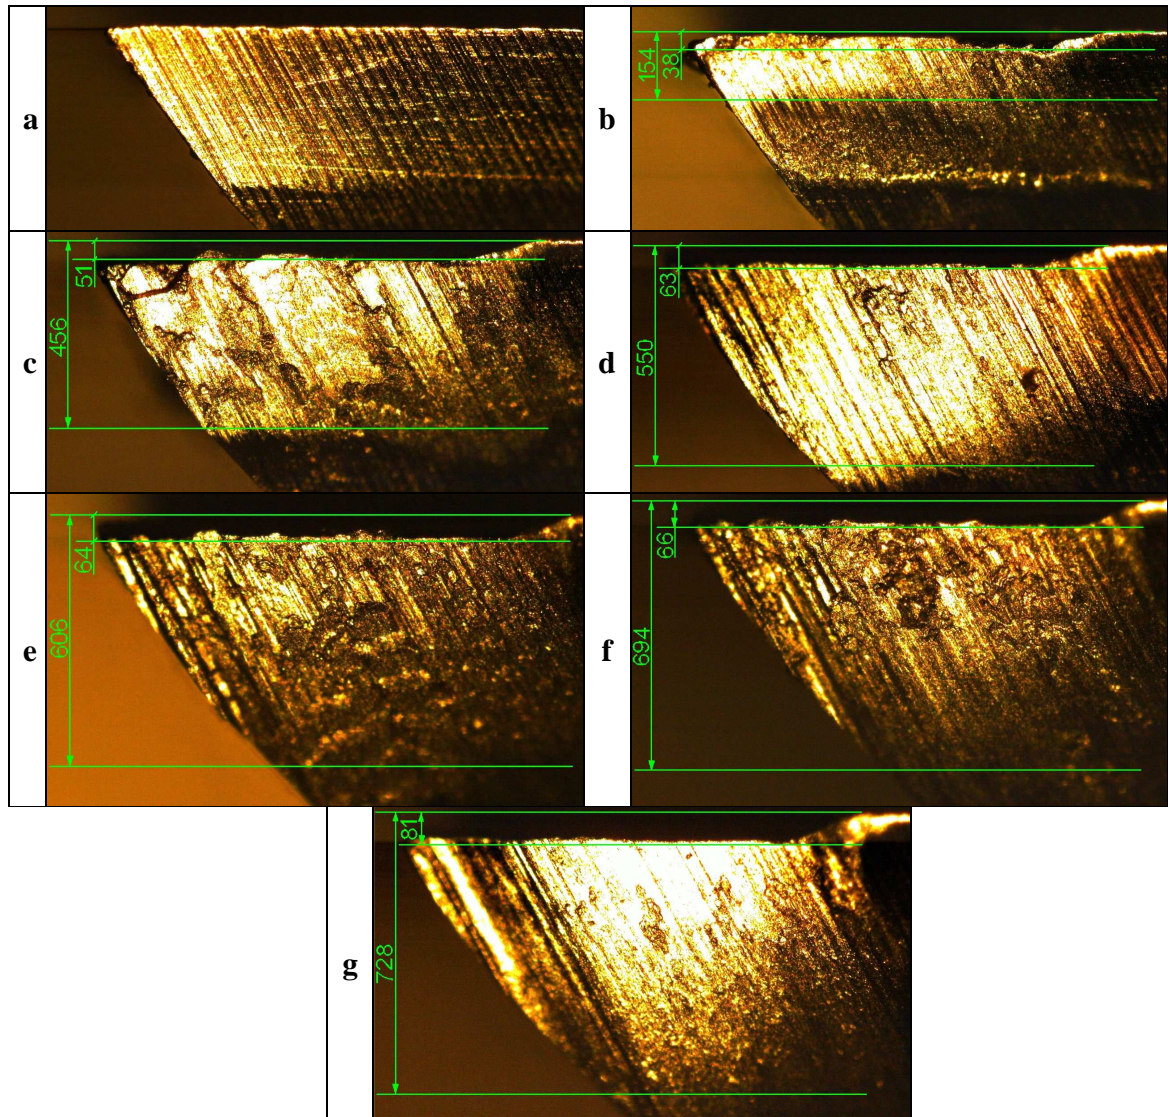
MTE 9mm end mill tooth # 1 trochoidal toolpath clearance face wear a) Fresh tool, b-g) After pass 1-6 (each 54 mm length, 27 mm width, 1 mm depth).
